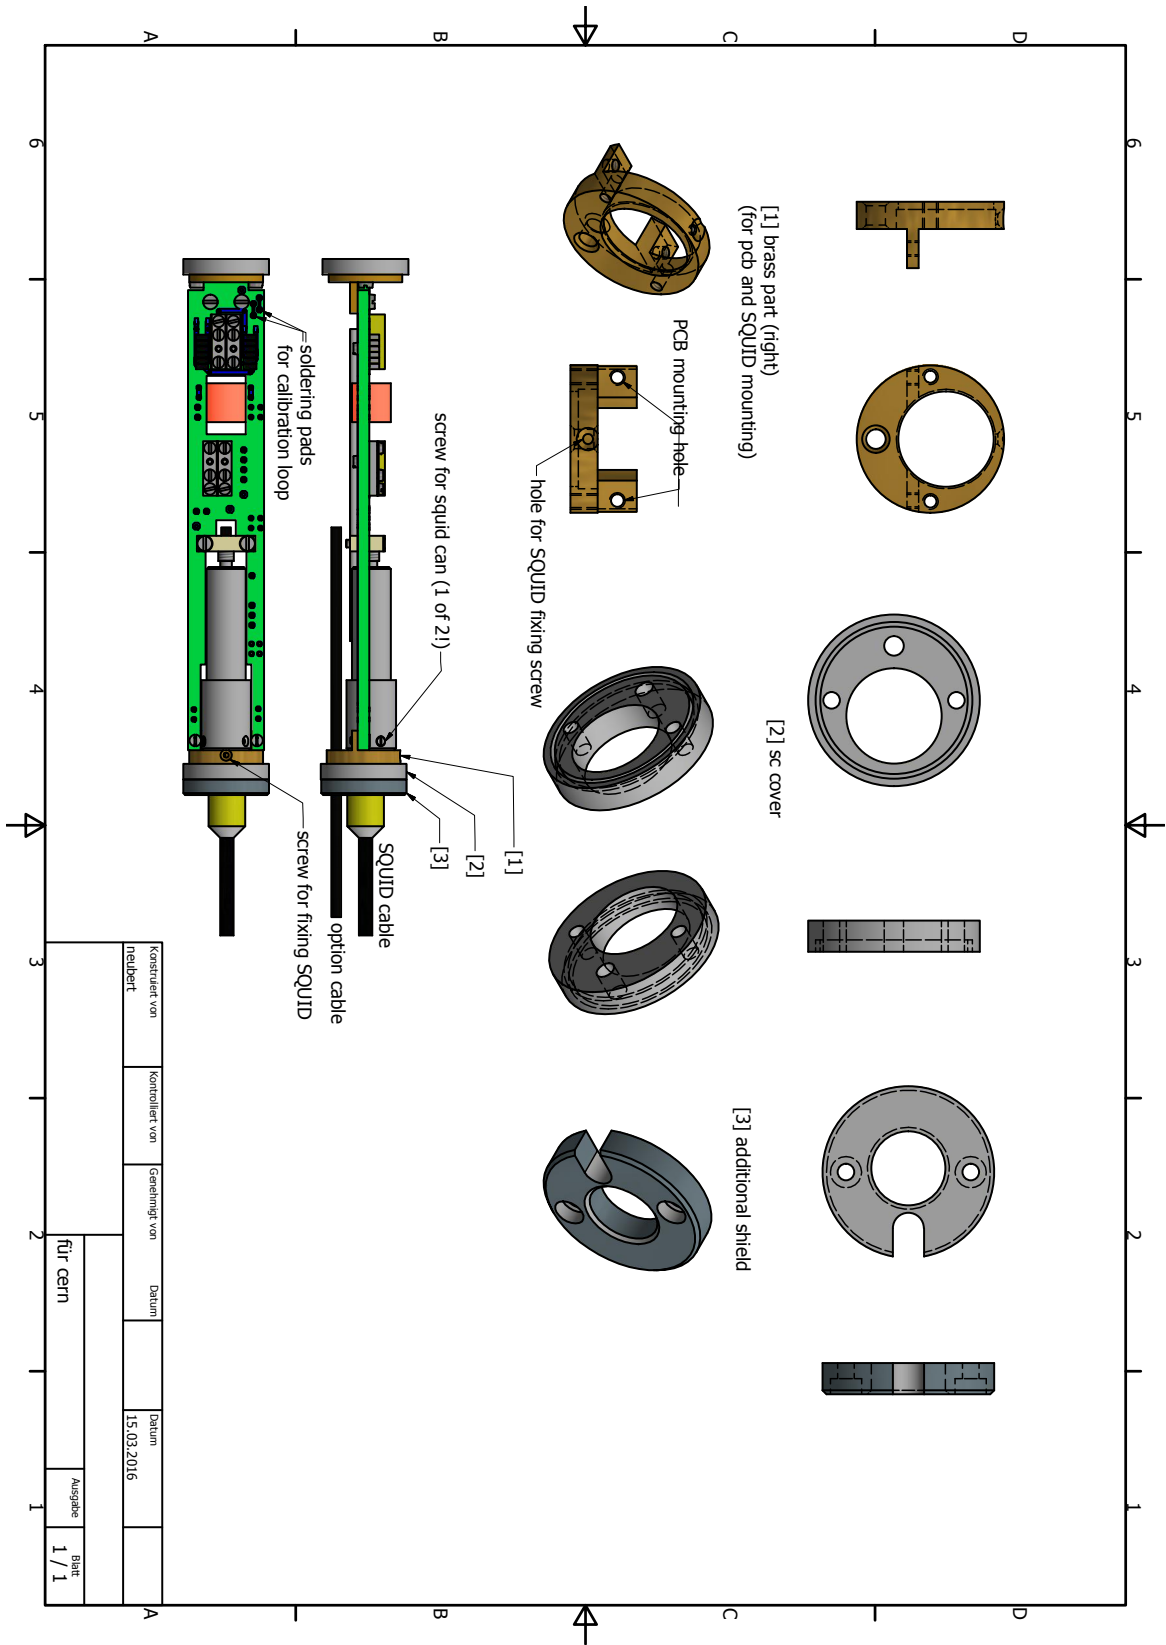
Mechanical drawing of the SQUID cartridge fabricated to hold PCB containing the SQUID and the coupling circuit.
